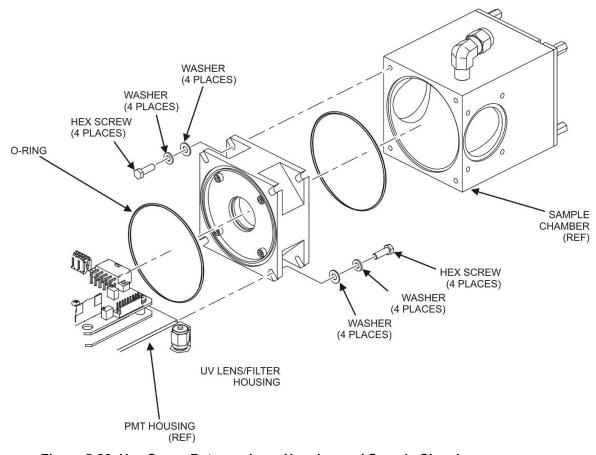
Hex Screw Between Lens Housing and Sample Chamber
